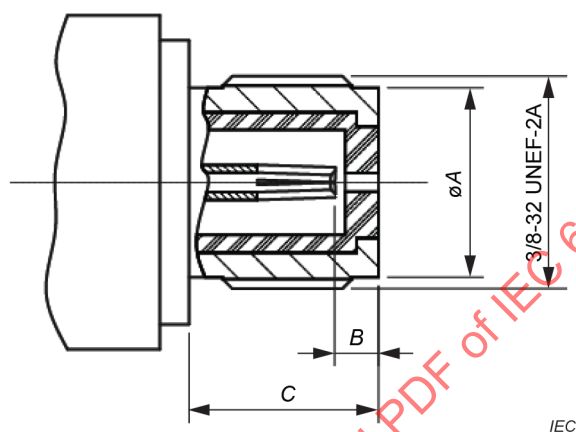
Satellite broadcasting “F” socket (for dimensions, see Table B.1)
